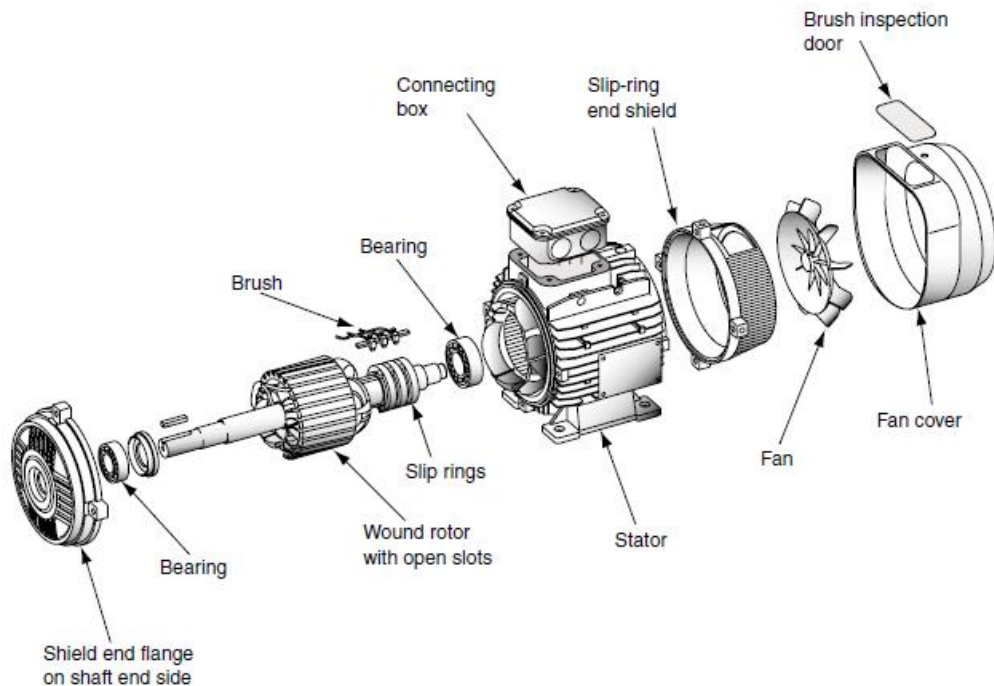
Exploded view of a slip-ring rotor motor[03]
